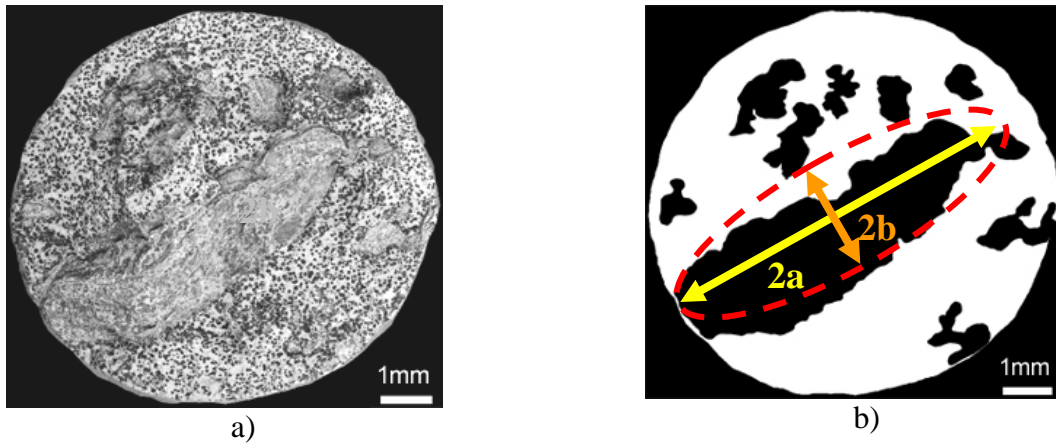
Fracture surfaces with casting defects for insert with diameter 9 mm and A = 1.4 % a) SEI macrograph b) processed picture for defect sizing.
